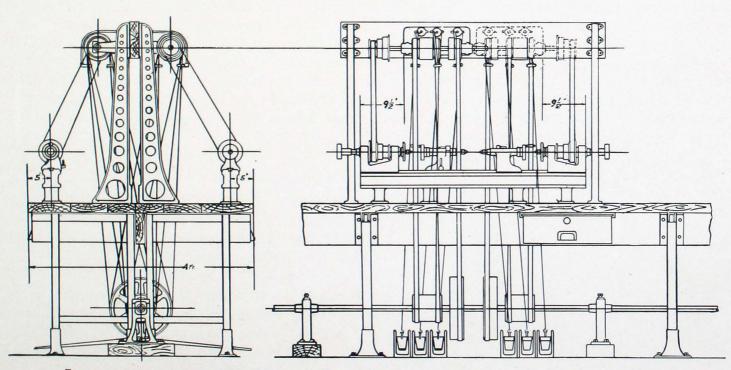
Group of Lathes on Double Bench, Drive from Underneath Lineshaft with One Motor for Group.
